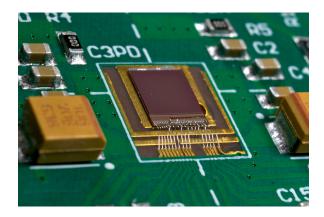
C3PD chip thinned down to 50 µm, mounted and wire-bonded on the PCB.
